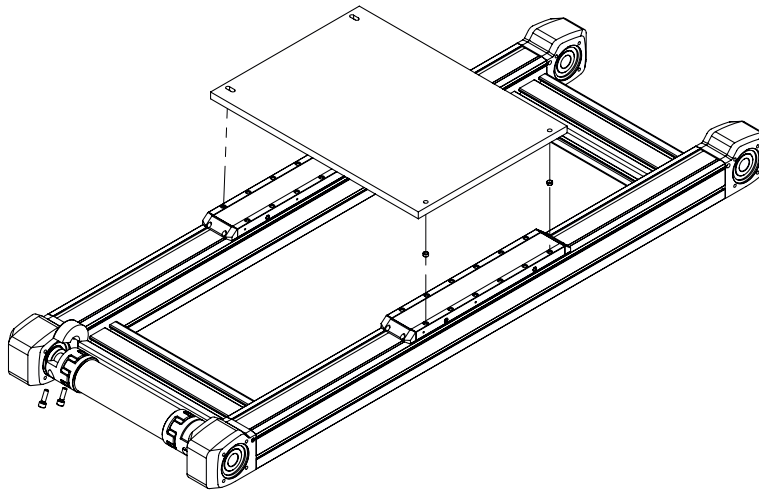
Mounting the adapter plate above both double axis carriages
